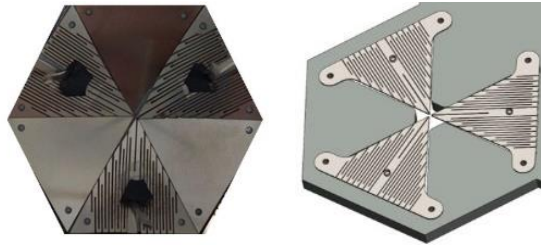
Modular Designs for the Tulip and Flat Flexure Designs.
